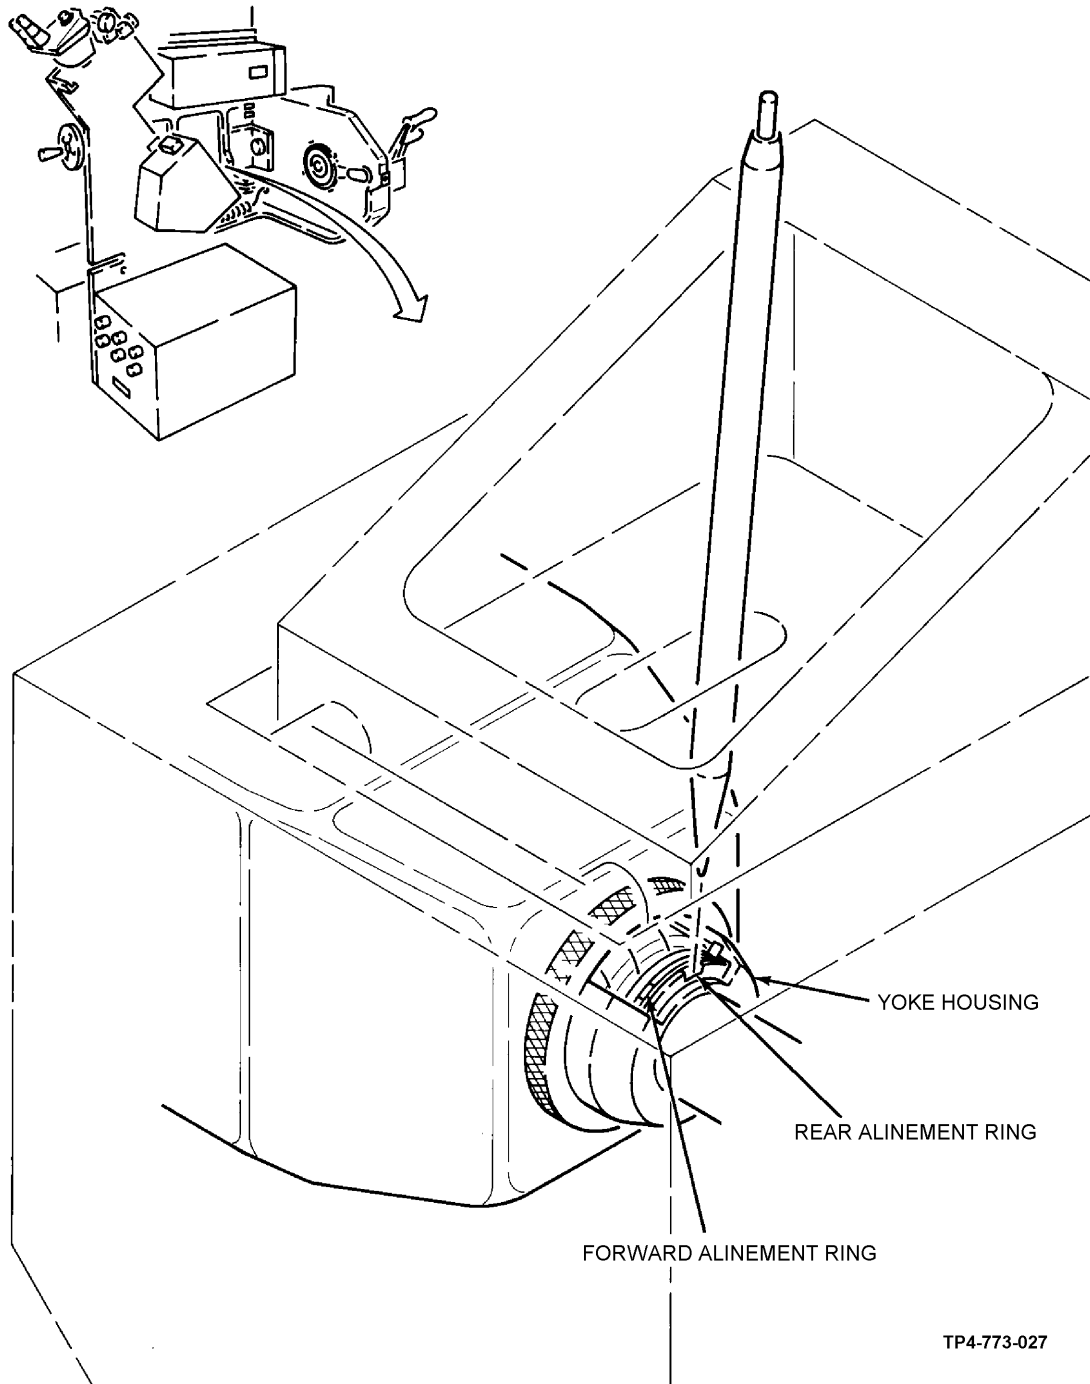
Control Panel Assembly CRT Yoke Alinement Rings Adjustment
